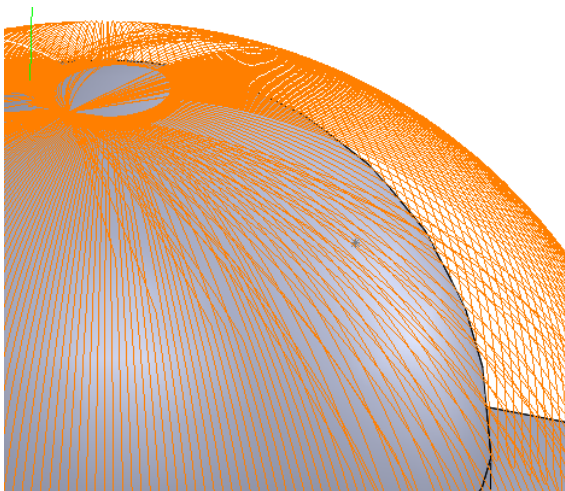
Toolpaths for 5-axis milling with employed radial strategy
